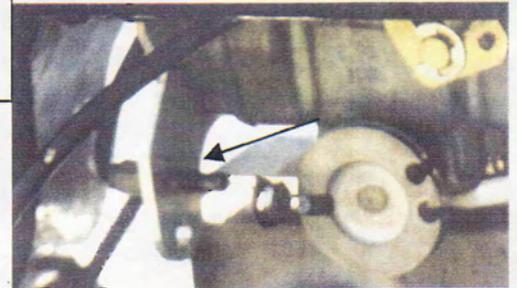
A Pull cable is installed in top hole of the cable support bracket
